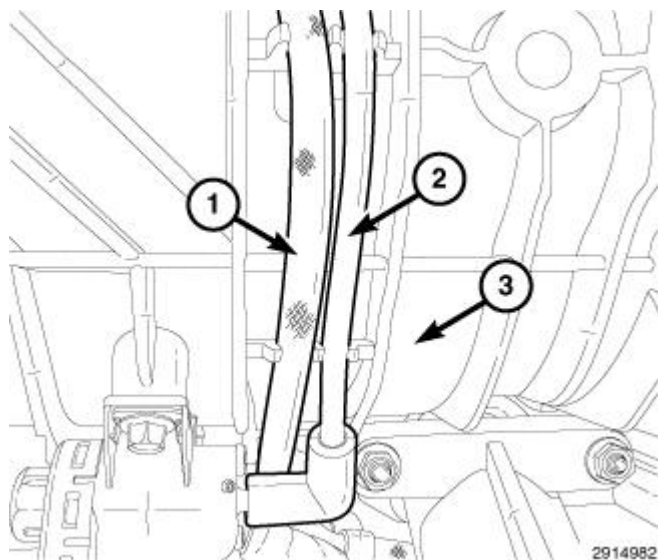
Fuel Injector Return Line, Vacuum Line & Intake Manifold
